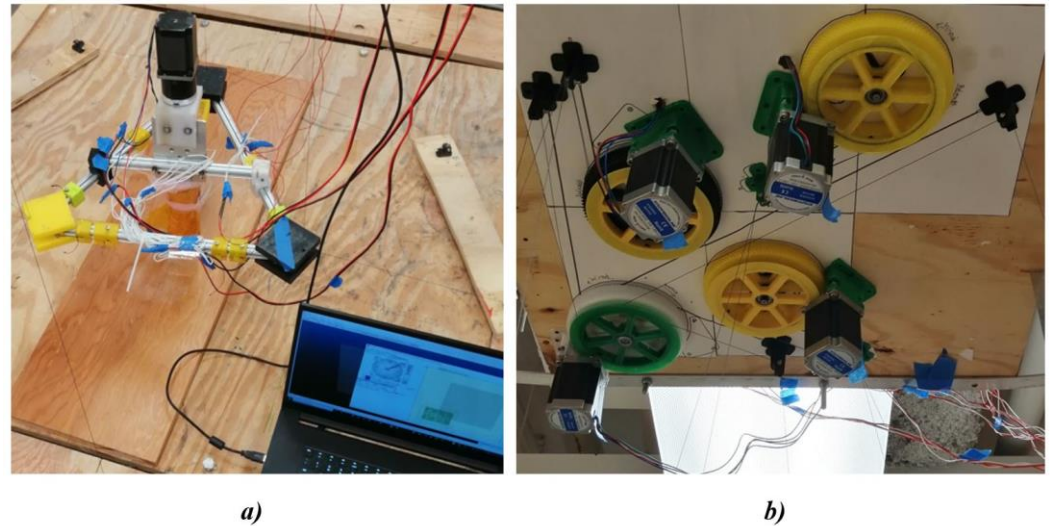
Hybrid printer assembly. a) end effector (FPF/FGF extruder) and the printing bed with A, B, and C anchors, b) ceiling unit with gears, motors, and line rollers.
